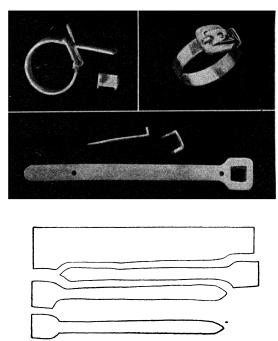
Belt buckle ring, showing method of assembling and how blanks are cut from a piece of sterling sheet.
